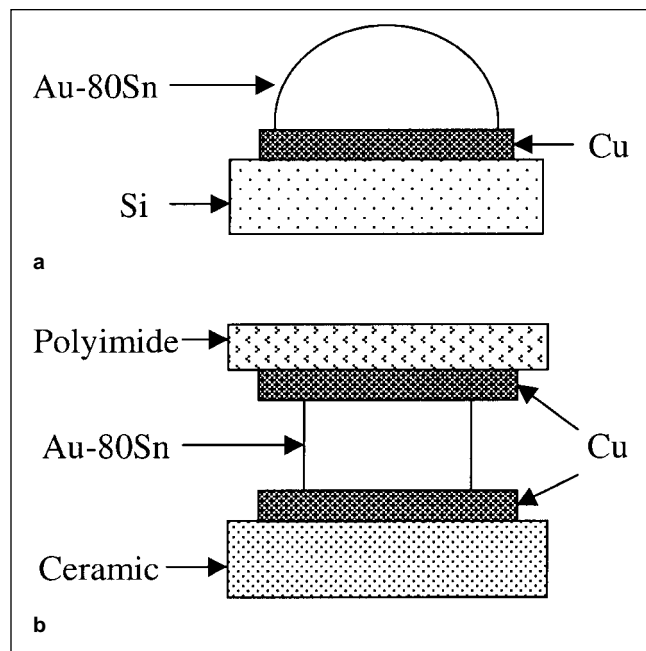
Schematic diagrams of the sample geometries used in this study (a) solder bump: unjoined bump (b) solder joint: joined bump.
